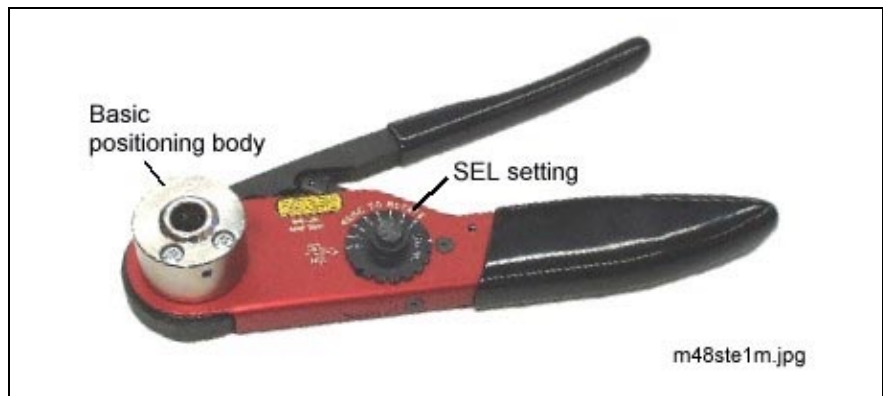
Crimping tool for power and control contacts INS0680 to 0683
